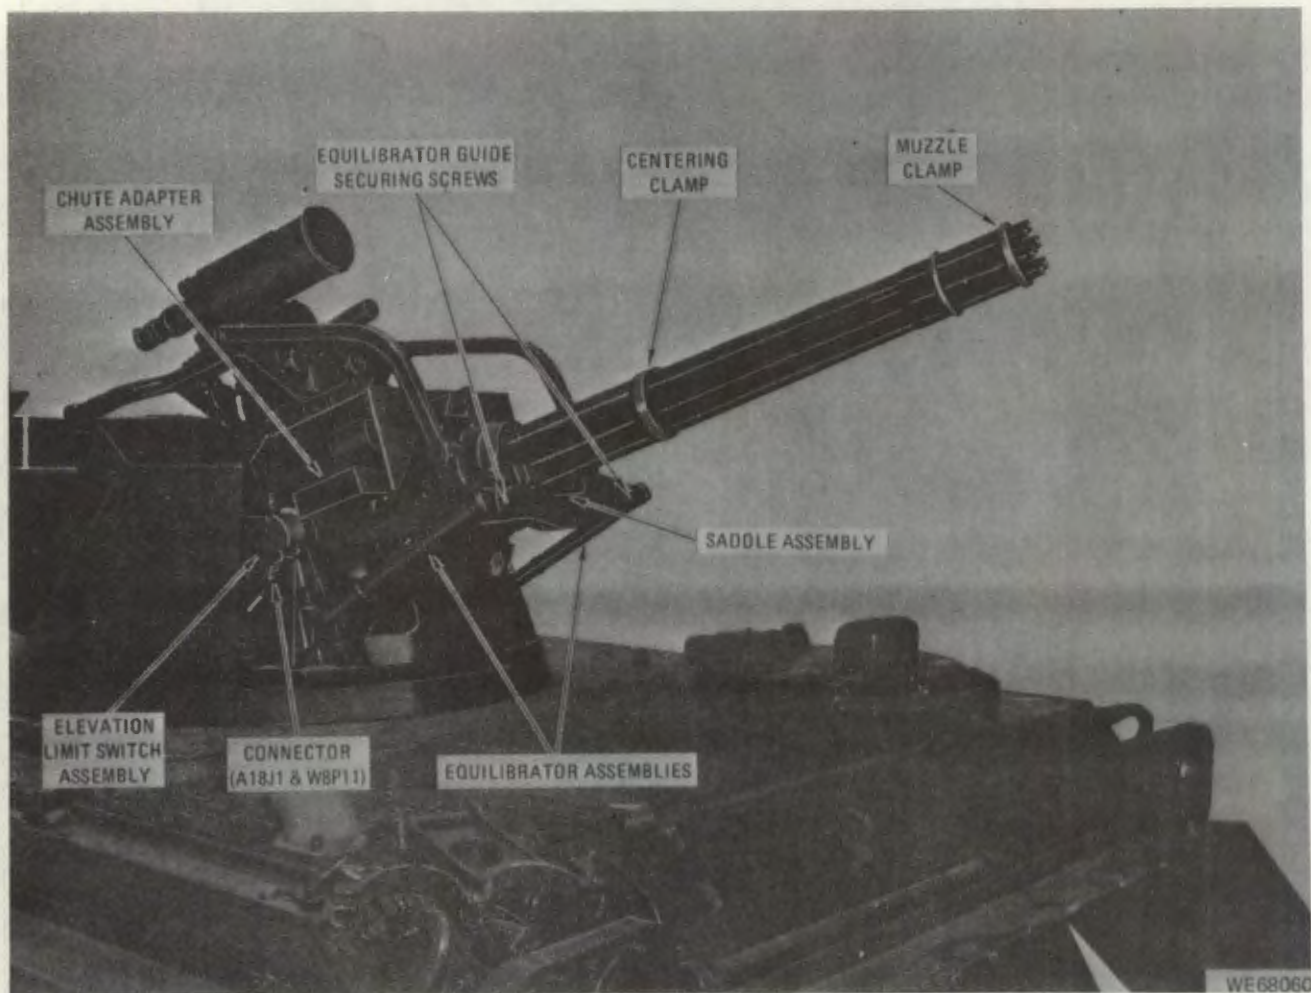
XM168 cannon and XM157 mount, right front view, parts location.
